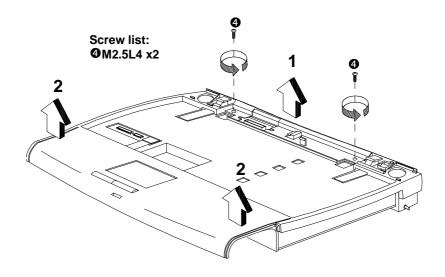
Detaching the Upper Housing from the Inside Frame Assembly
